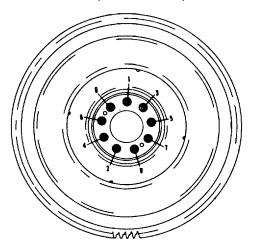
N-48. Flywheel to Crankshaft Tightening Sequence
